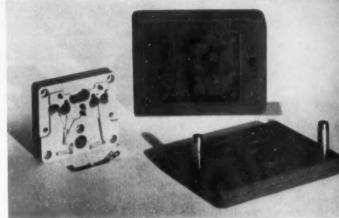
Casting of the exact position of locating pins in this assembly fixture eliminates the jig boring operation. Pins are set into the upper half of the molds and parts cast around them.
